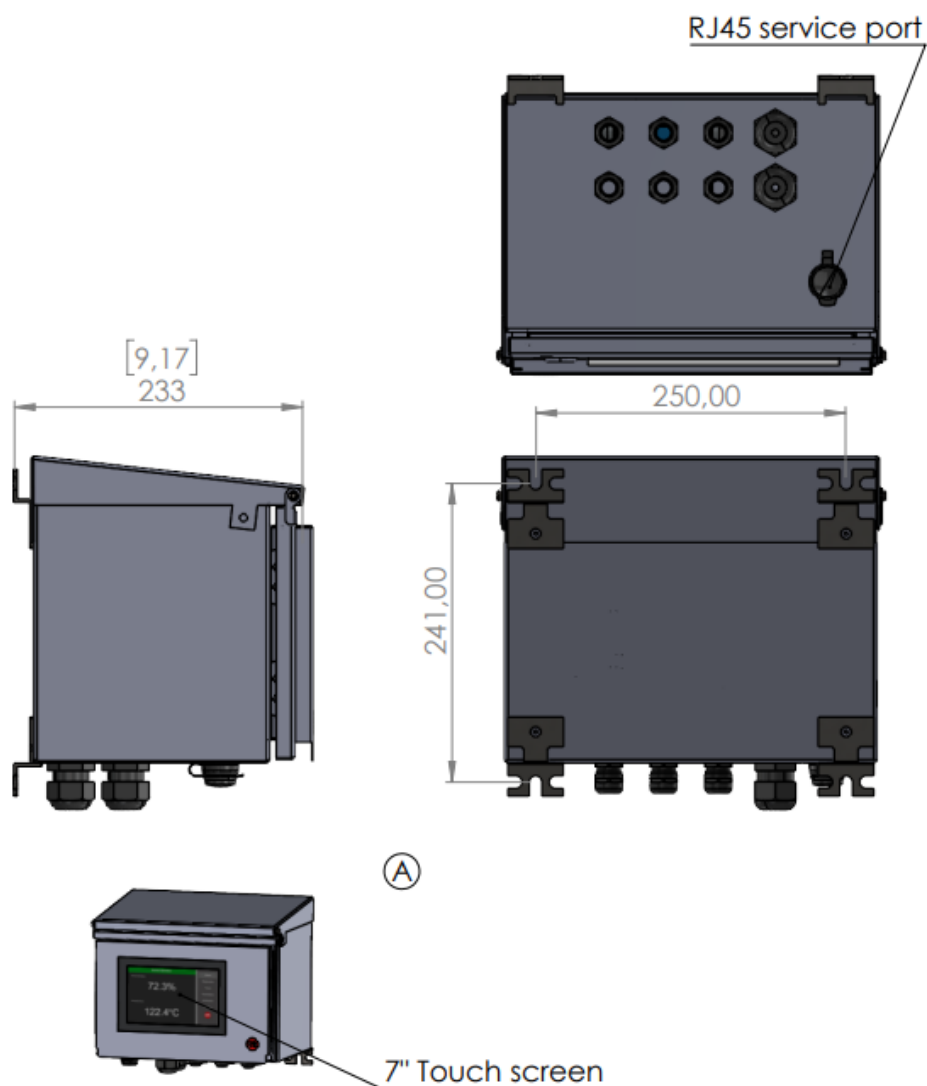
Dimensional drawing of Modular Connection Unit enclosure (Drawing 10528).
